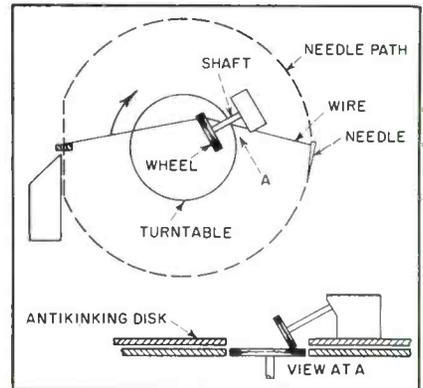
Threading mechanism, showing wheel-engaging turntable
